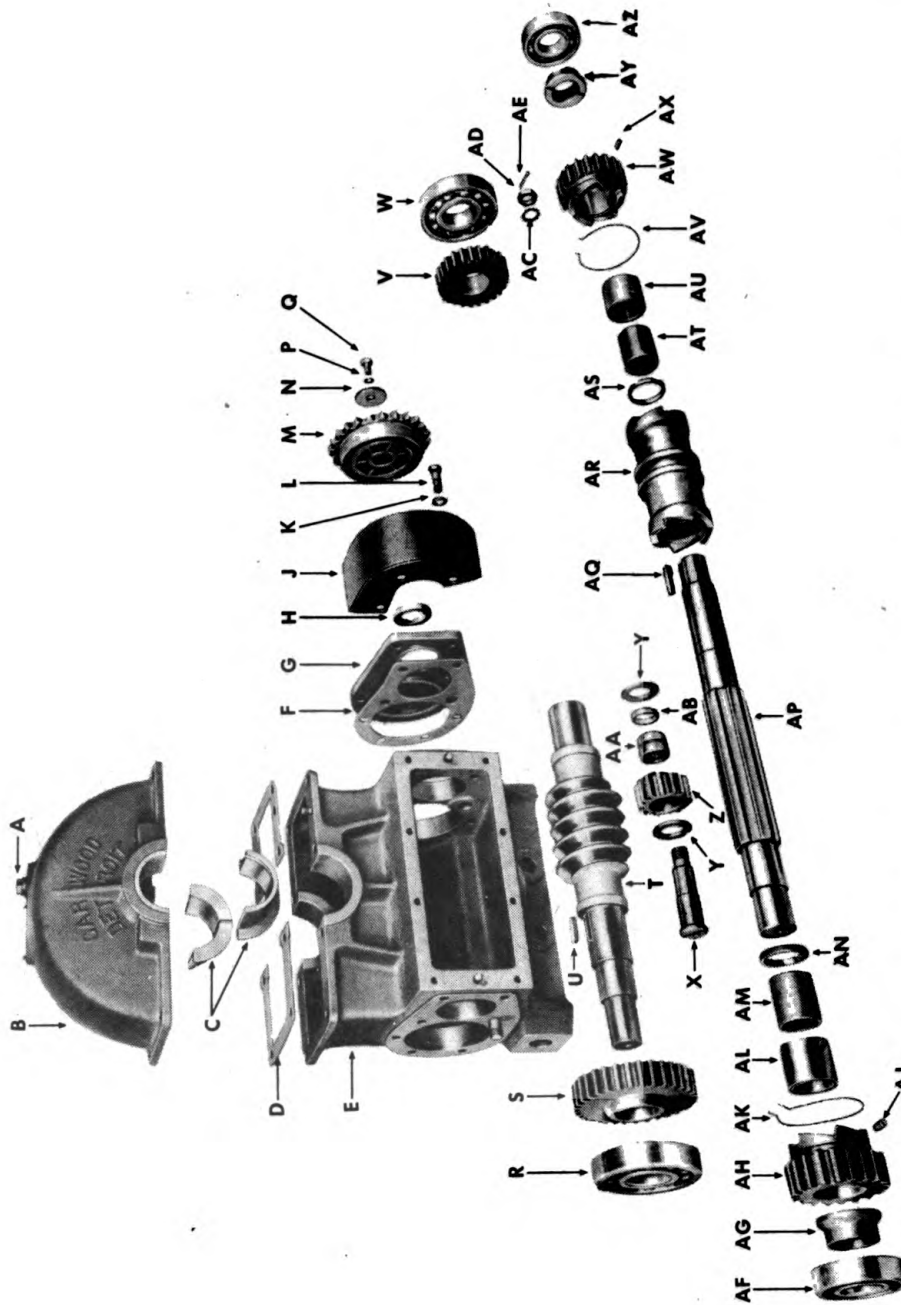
Front Tandem Winch Gear Case — Disassembled
